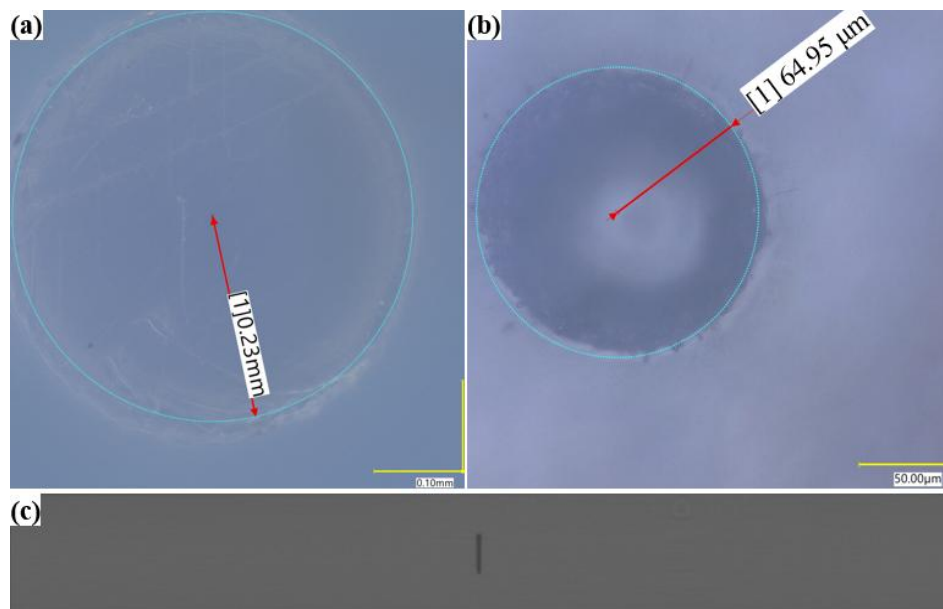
Molded sample (a) the shape and estimated hole size (500 μm target) after molding procedure under microscope check (b) the shape and estimated hole size (100 μm target) after molding procedure under microscope check (c) the side view picture of molded sample under Micro CT check
